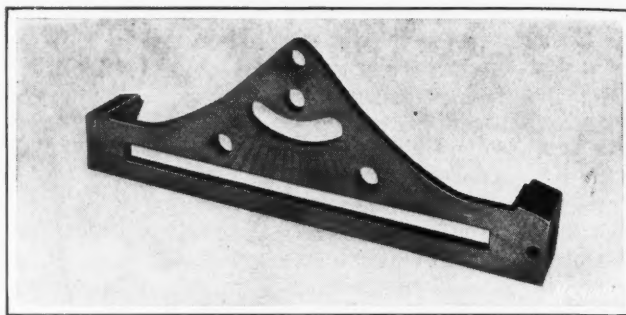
Two-stand Bracket for an X-ray Apparatus, also produced by Die-casting
